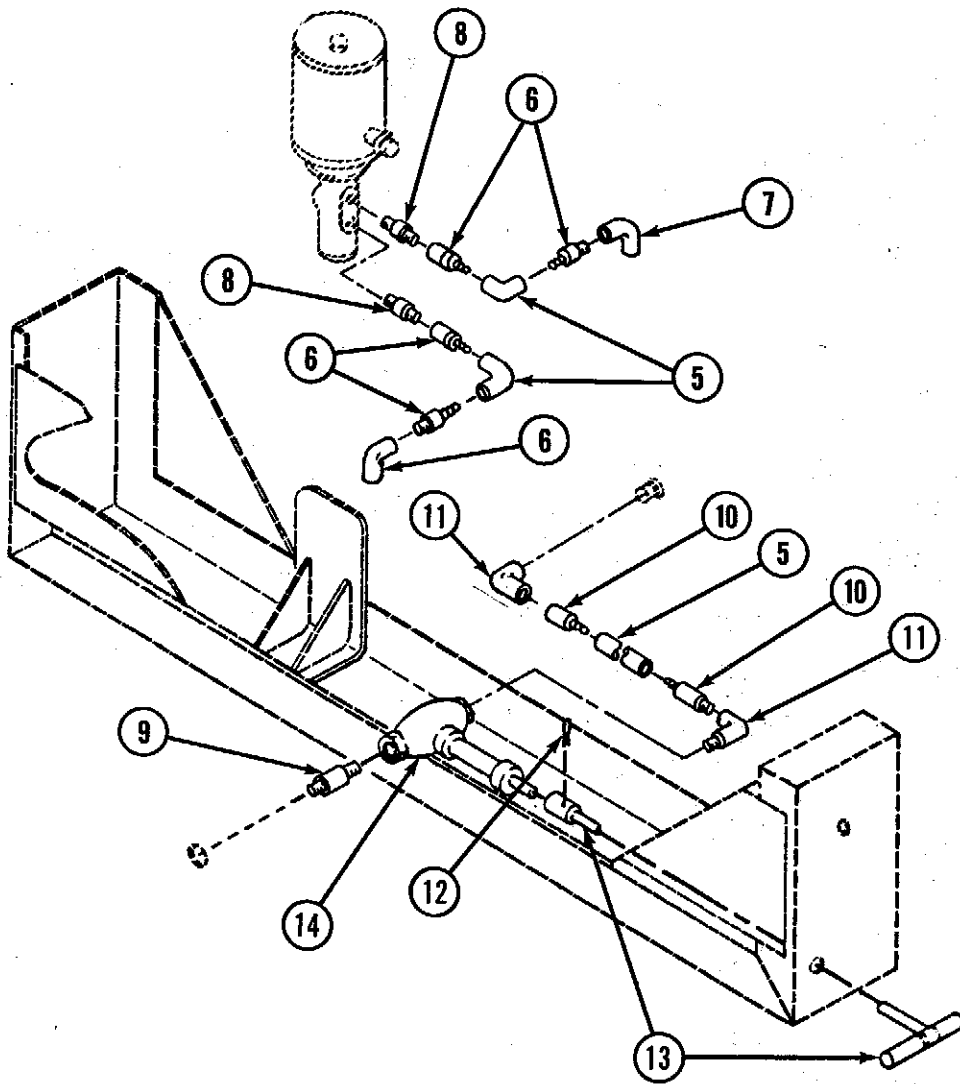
Internal Fuel Lines and Fittings (Sheet 2 of 2)
